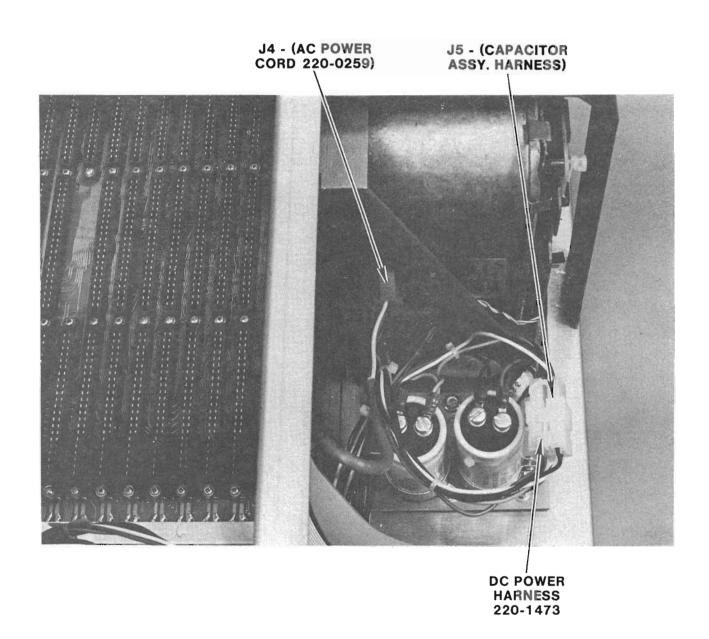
WINCHESTER DISK DRIVE POWER CABLE CONNECTIONS
